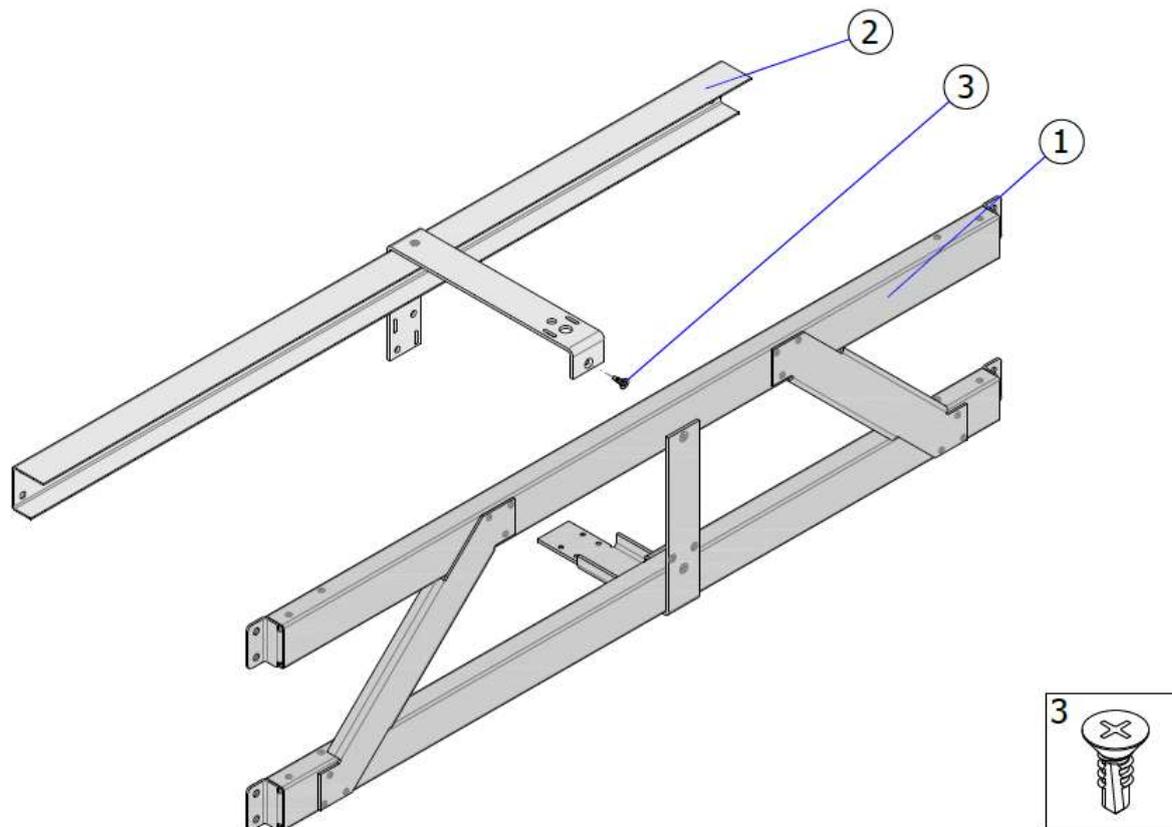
ISOiK-Ok60-01.25 [structural lattice with wall-mounted channel section]
